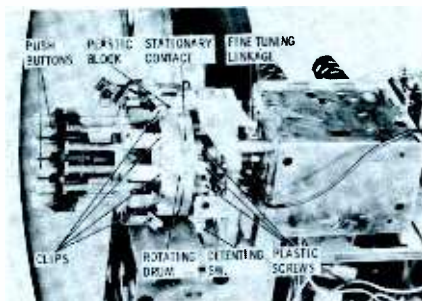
Details of automatic tuner used in the General Electric Chassis U3.
